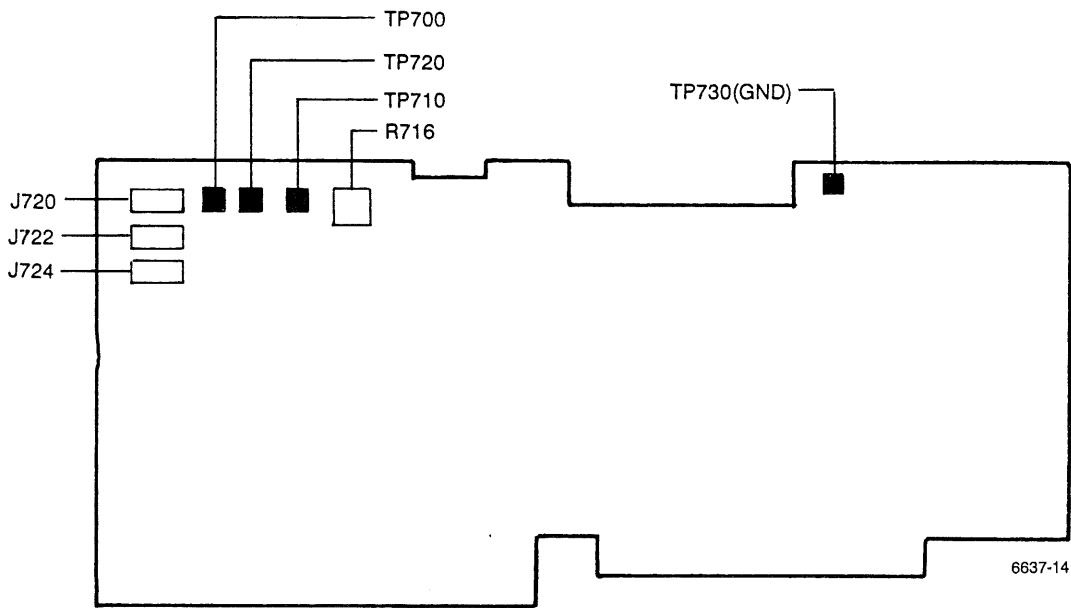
318A Side view of A07, Serial Analysis/ RS-232C board.
